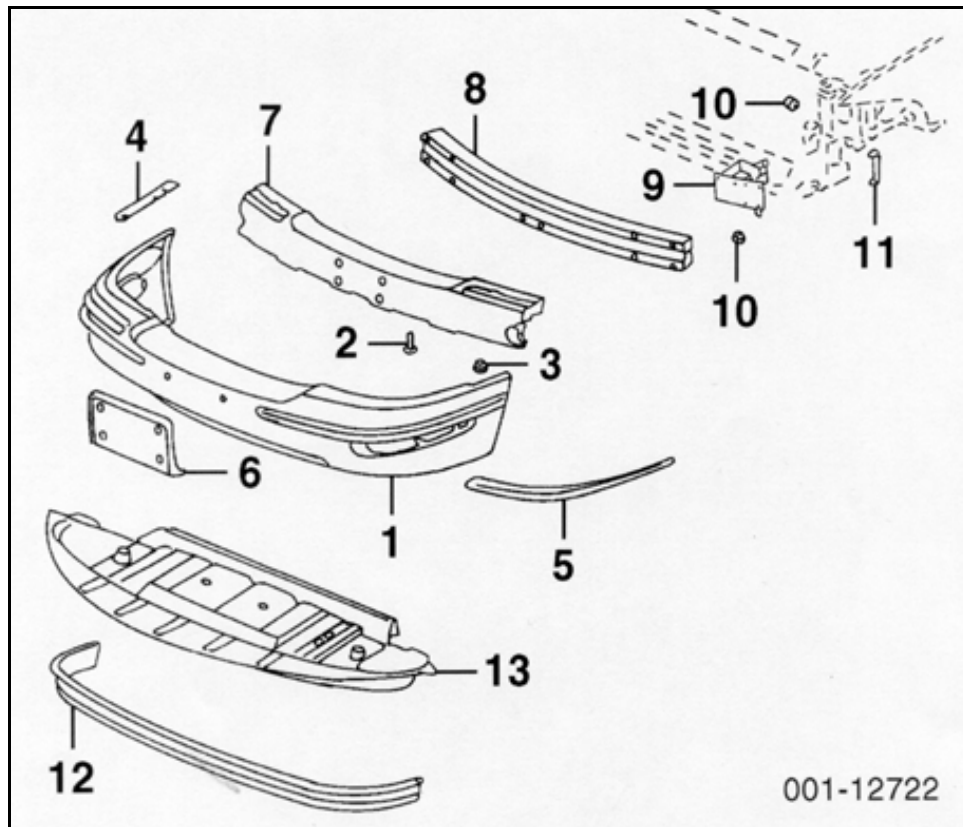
1998 Buick Park Avenue Front Bumper Construction
